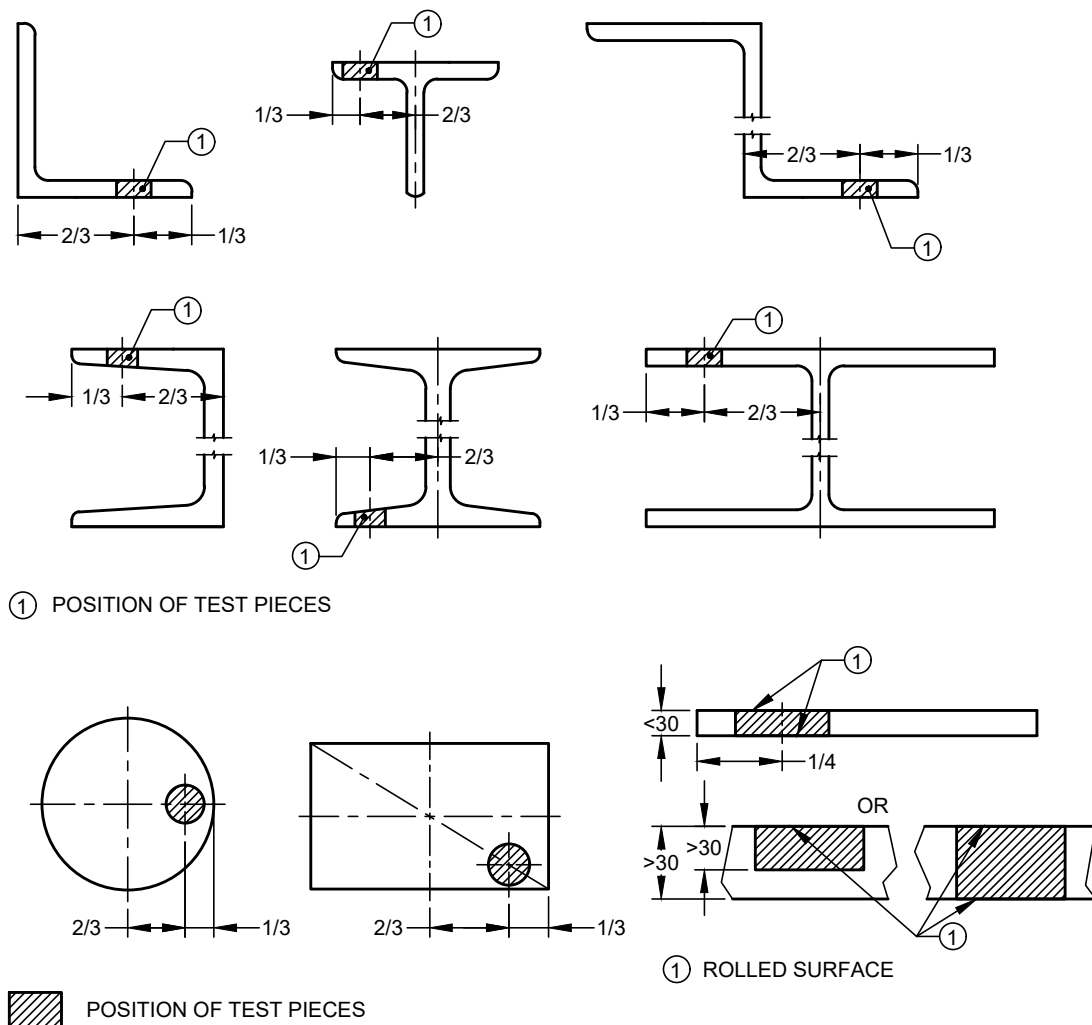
STRUCTURAL STEEL SECTIONS, POSITION AND ORIENTATION OF SAMPLE
